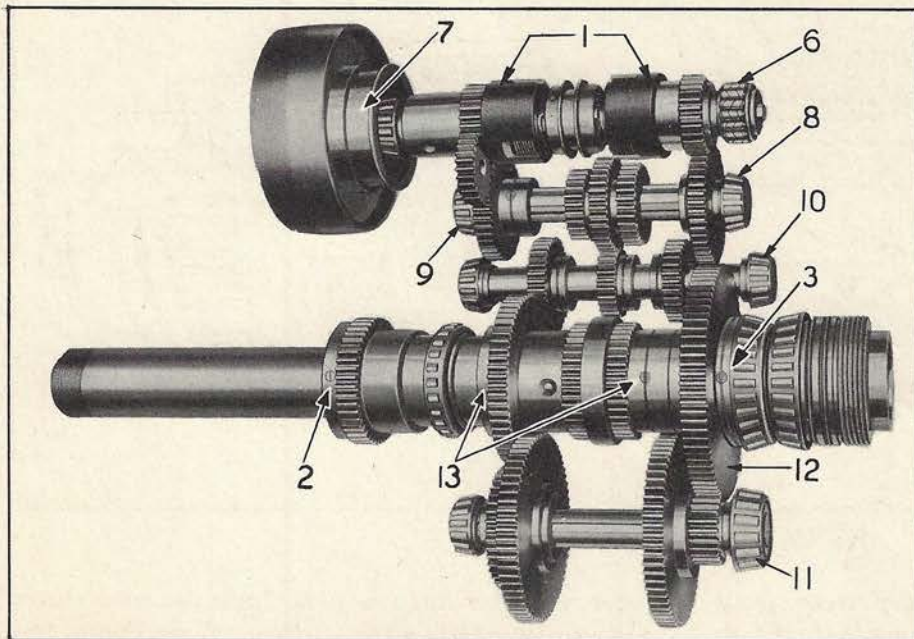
Twelve Speed Head of No. 4 Turret Lathes
